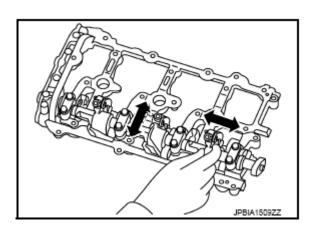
Checking Drive Shaft And Control Shaft Link Back-Lash Courtesy of NISSAN NORTH AMERICA, INC.
